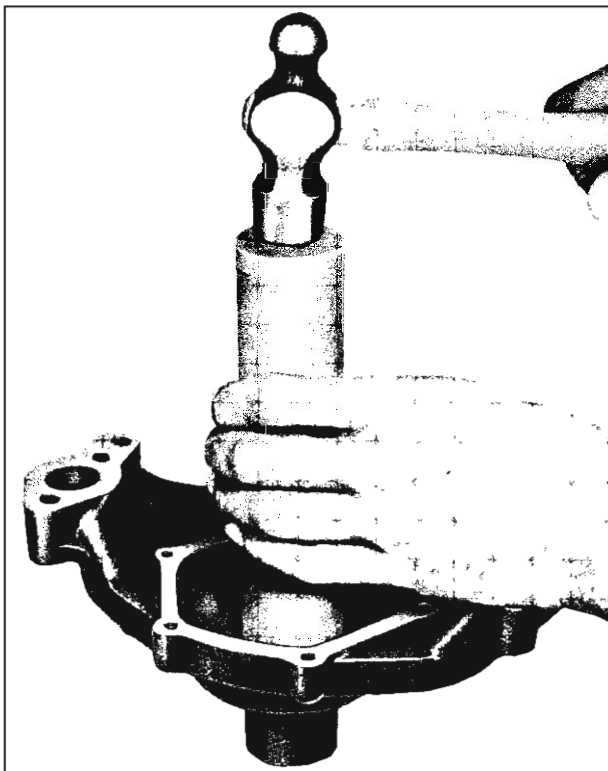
Installing Seal (235 and 283 Cu. In. Water Pump)
